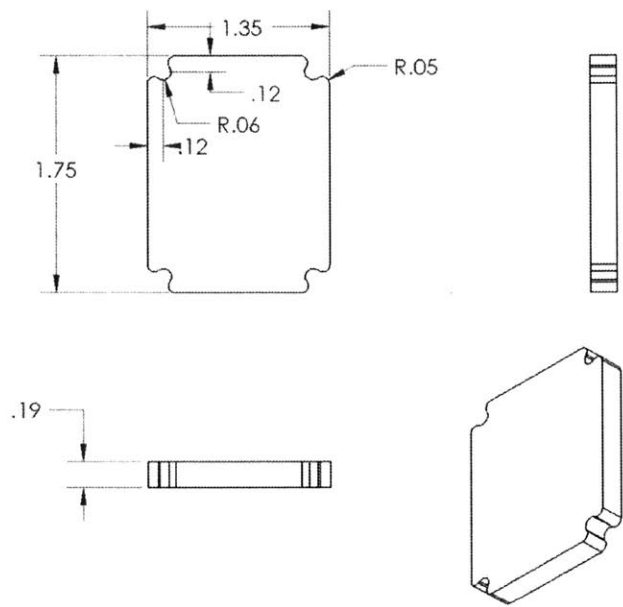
The design dimensions for aluminum jacket and inner PTFE wall. (unit: inch)
